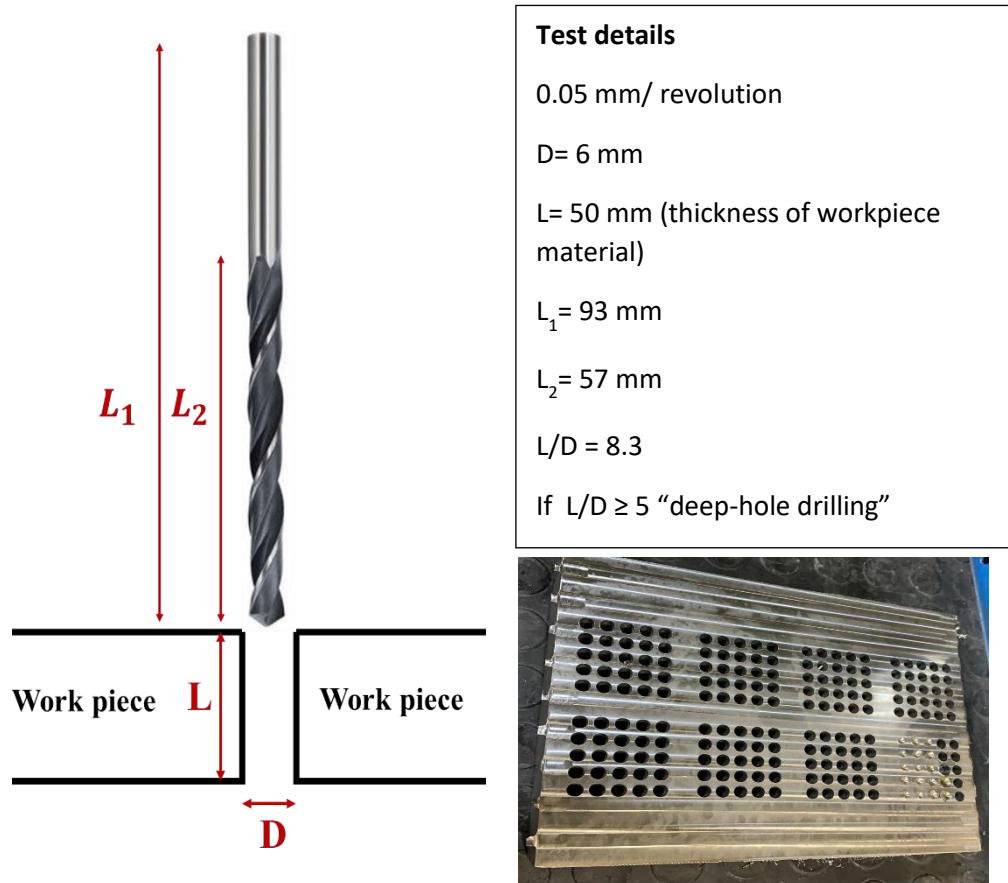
Dimension of cutting tool, test details, and workpiece material after the test.
